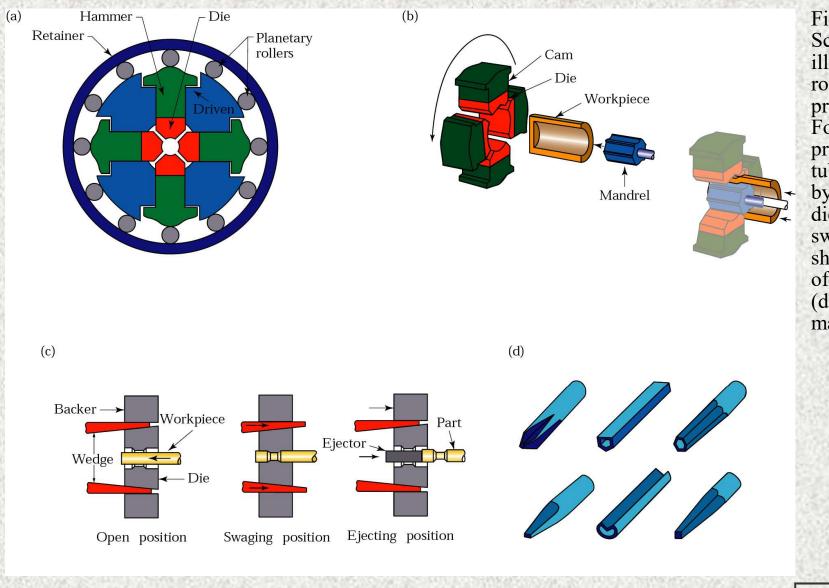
(a) Schematic illustration of the rotary-swaging process. (b) Forming internal profiles on a tubular workpiece by swaging. (c) A die-closing type swaging machine, showing forming of a stepped shaft. (d) Typical parts made by swaging.
